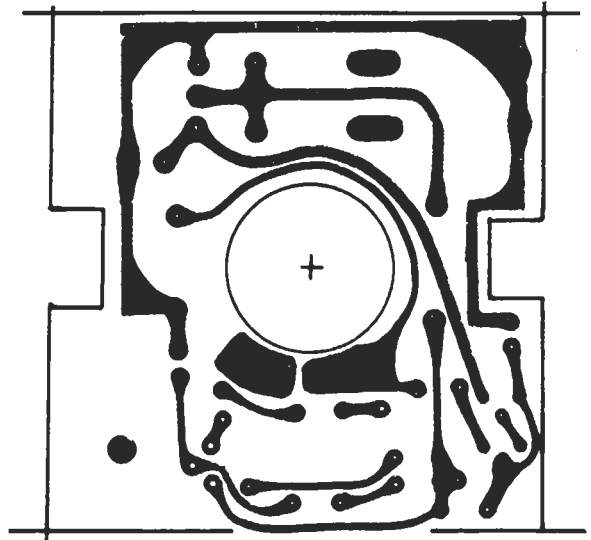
PCB foil pattern, the pot RV1 and switch SW2 are mounted on the foil side of the board.
